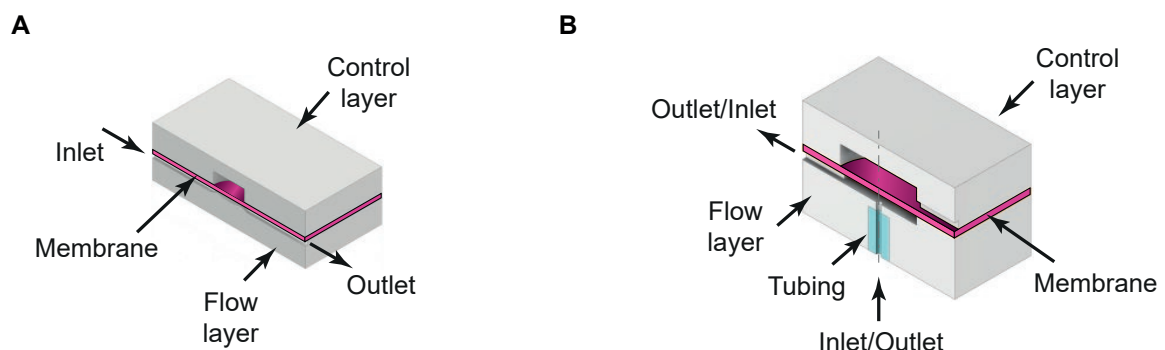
Comparison of the soft valve designs. (A) Internal structure of the original soft valve design and main components. (B) Section view of the new soft valve design and its main elements.
